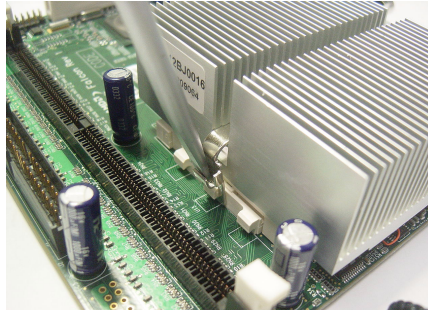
Connecting the Heatsink Clip at the Back of the Processor Socket
